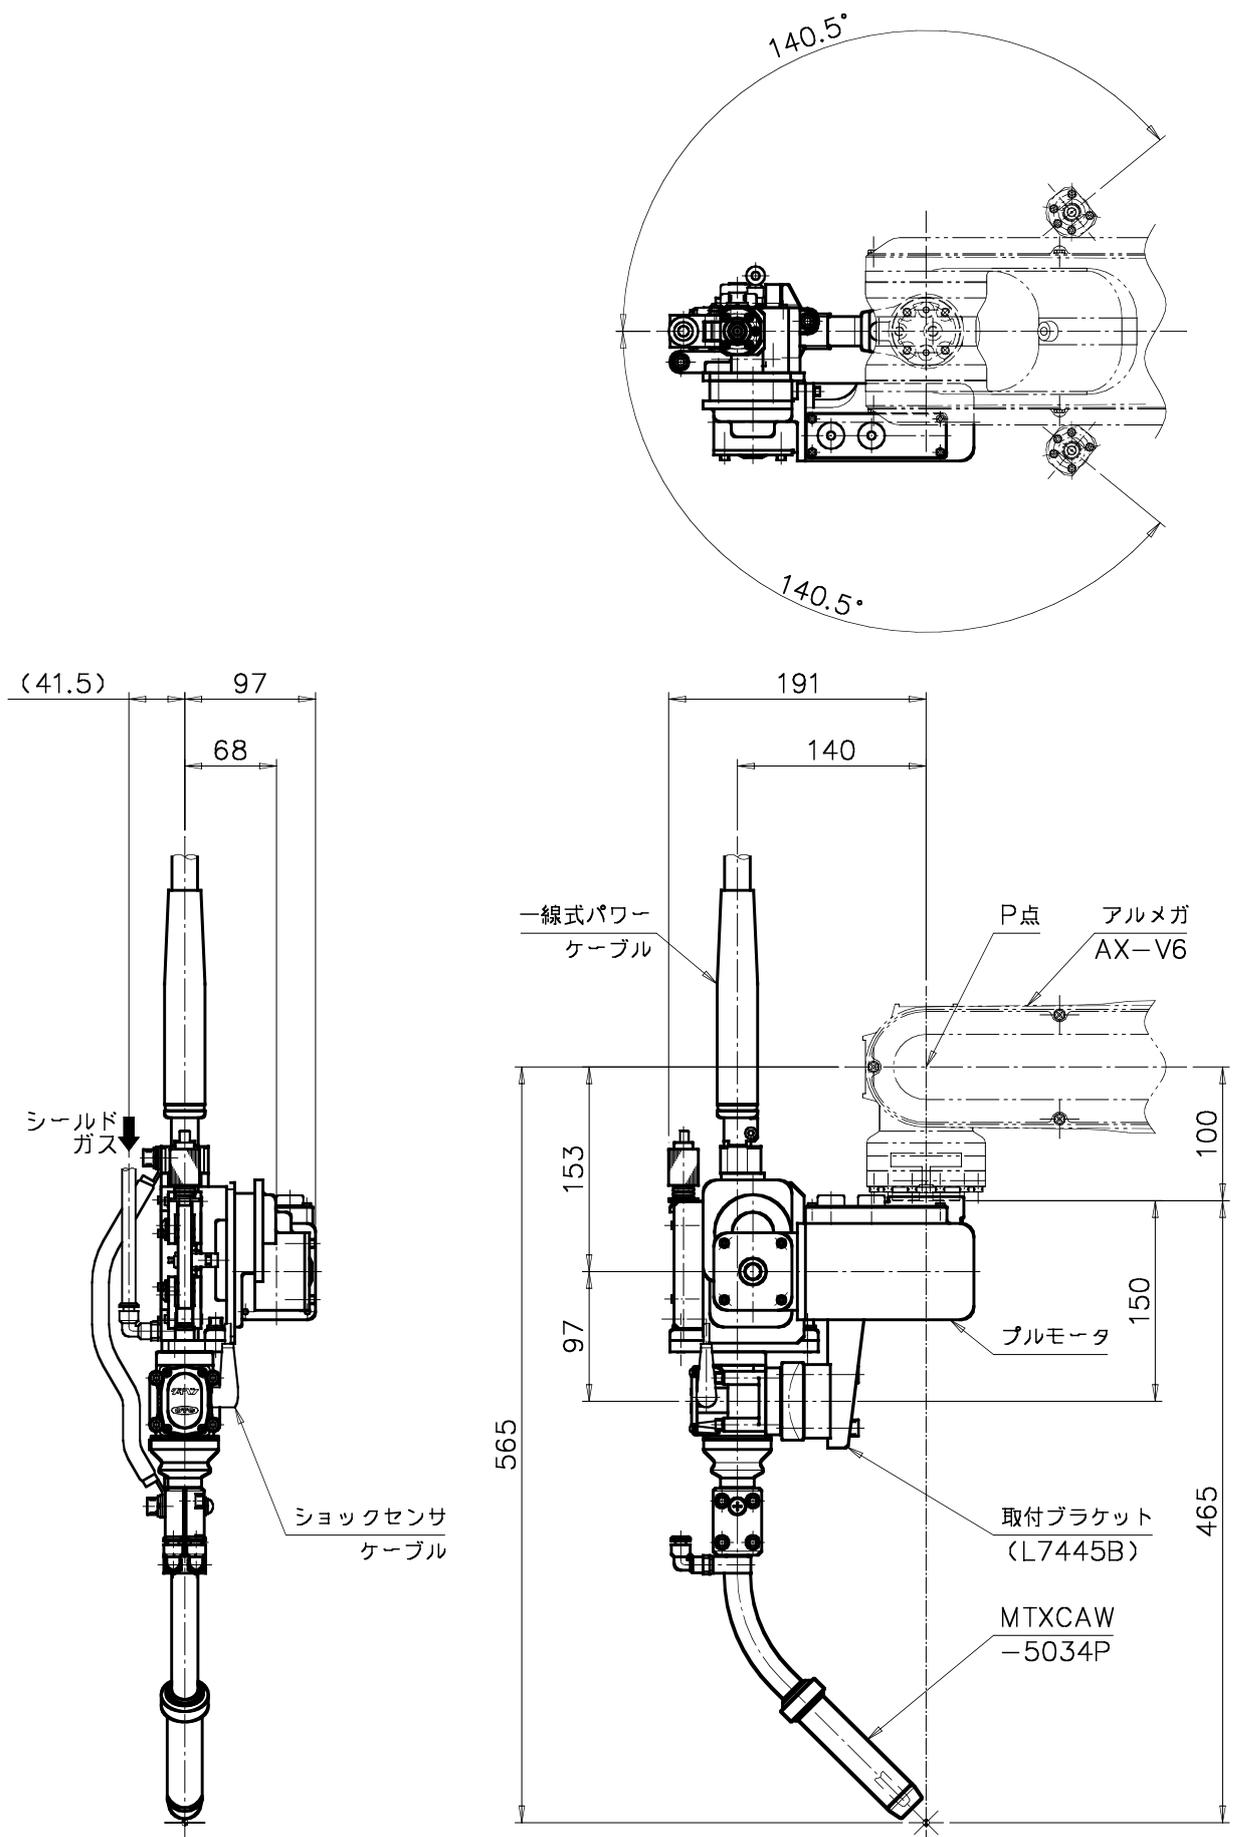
Assembly drawing of pull feeder unit L-7591 + MTXC-3534P
